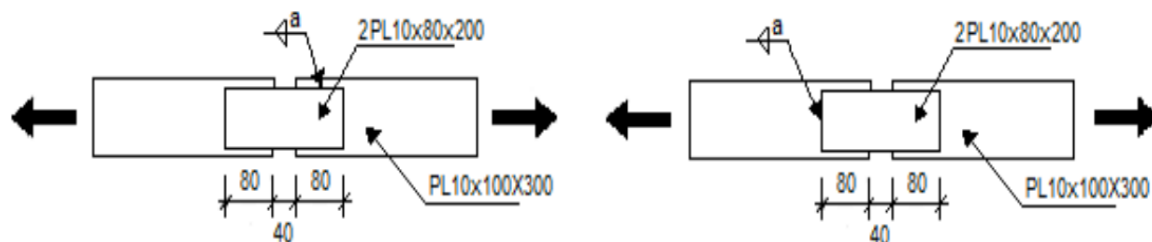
Test specimens for longitudinal welds (left) and transverse welds (right) [11].
